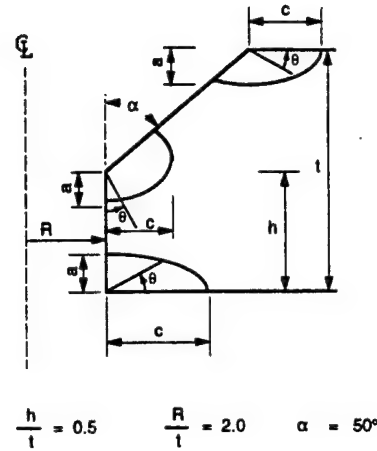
Rivet geometry detail in vicinity of crack location
